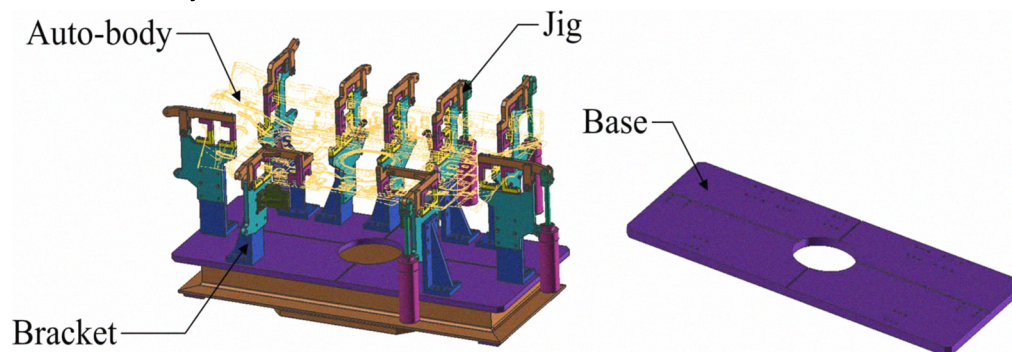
Instance of a station in an auto-body welding line.
